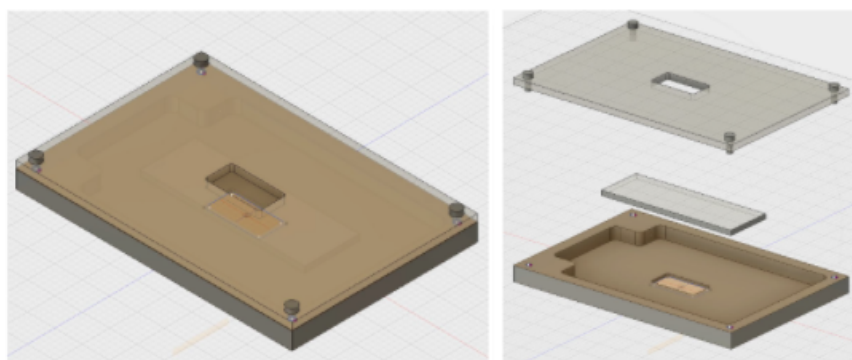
Three-dimensional constructed (left) and exploded (right) view of the heating platform. The middle piece in the exploded view denotes a microfluidic device. The heating mantle itself is shown in brown and is constructed in brass. The lid is shown as clear since it is constructed in acrylic glass. The heating platform was calibrated using an ice water bath to determine whether the surface thermocouple was in good working condition. This was done by submerging the probe in ice water and leaving it for 10 min to stabilise. After 10 minutes the measured value of the ice water on the controller was 0°C for the surface thermocouple. Since the heating foils do not cover the entire surface of the mantle, the platform was also heated to 37°C and 50°C and observed with a thermal camera (FLIR) to determine the temperature variability on the surface of the heating platform. Figure D.9 shows that the temperature variability is low.
